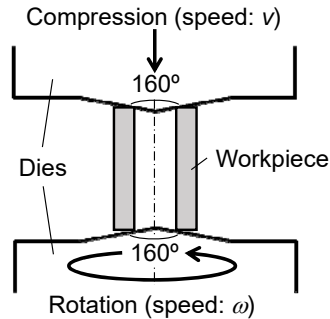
Schematic illustration of upsetting with one-way torsion for hollow cylindrical workpiece using conical dies.
